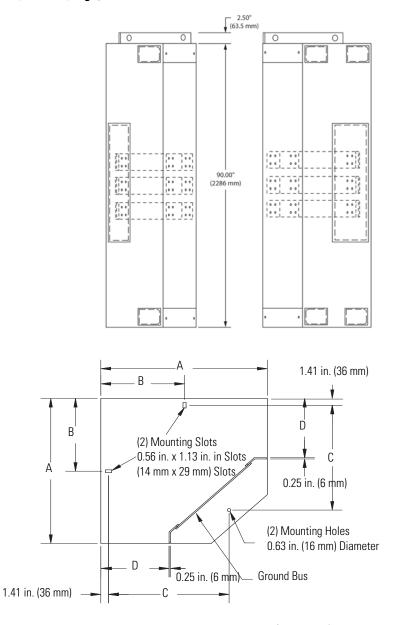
Mounting Dimensions for NEMA 3R and 4 Section
